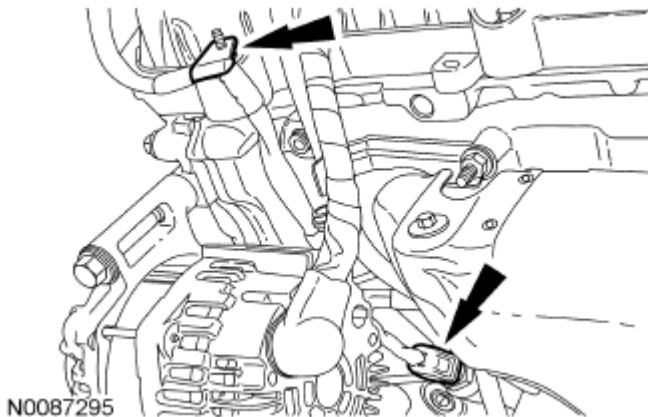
Locating Engine Oil Pressure Switch Electrical Connector
